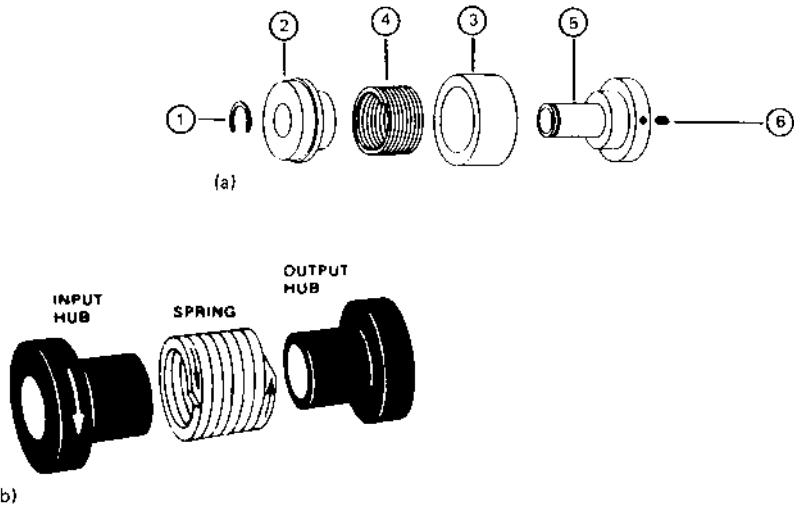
Spring clutch and its components. (Courtesy Warner Electric Brake & Clutch Co., South Beloit, IL.)
